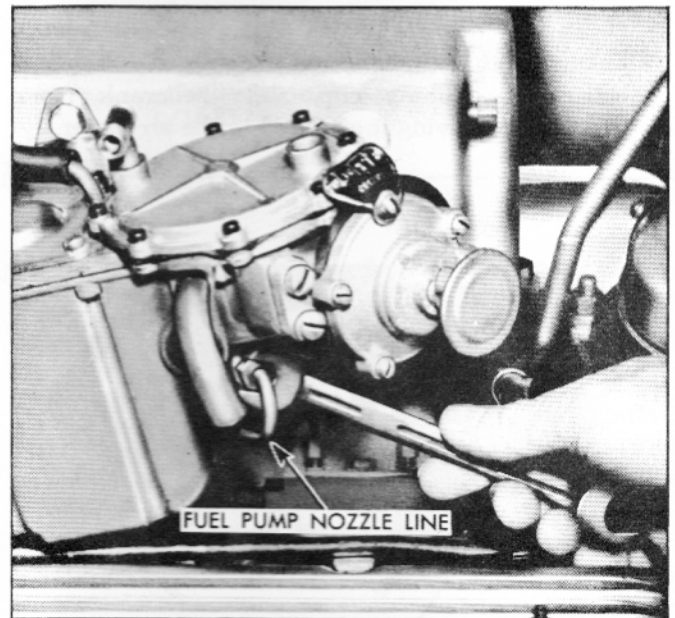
Loosening Fuel Pump Nozzle Line Fitting
